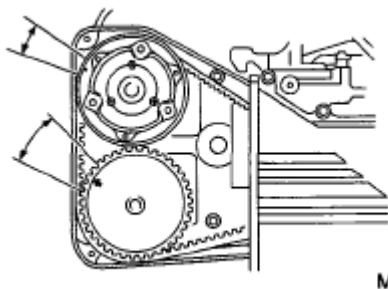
Measuring #1 Cylinder Exhaust Valve And #4 Cylinder Intake Valve Clearances
